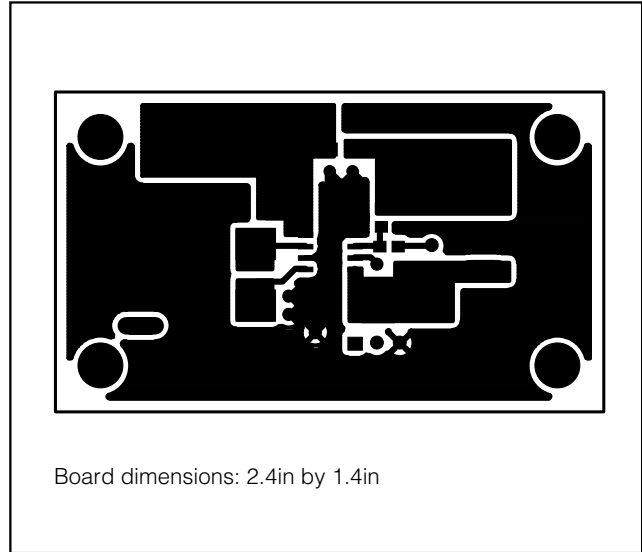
MAX889S EV Kit PC Board Layout—Component Side
